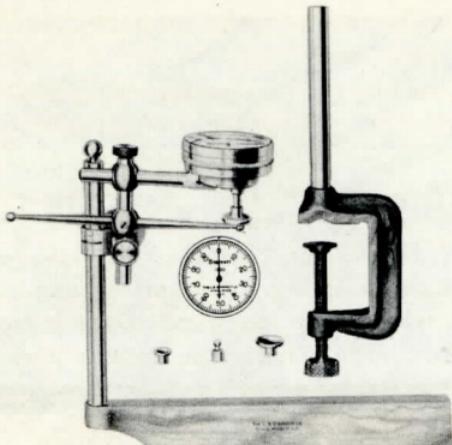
A Starrett Universal Dial Test Indicator with attachments.
